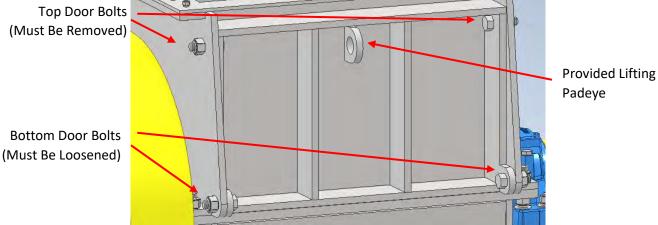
Rear Door Bolts (No Hydraulic Rear Door)
